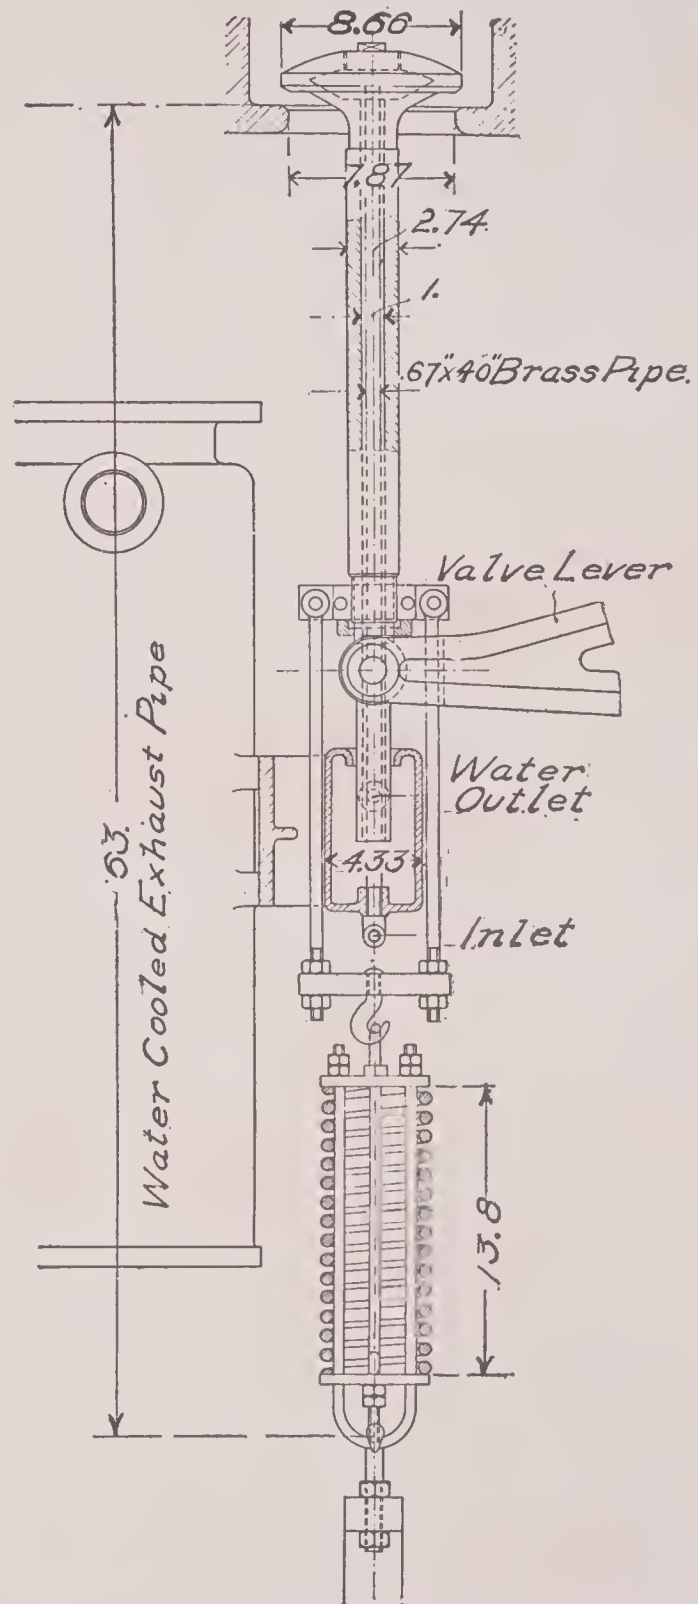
Exhaust Valve, Pawlikowsky Type, for 100 H.P. Körting Engine.
